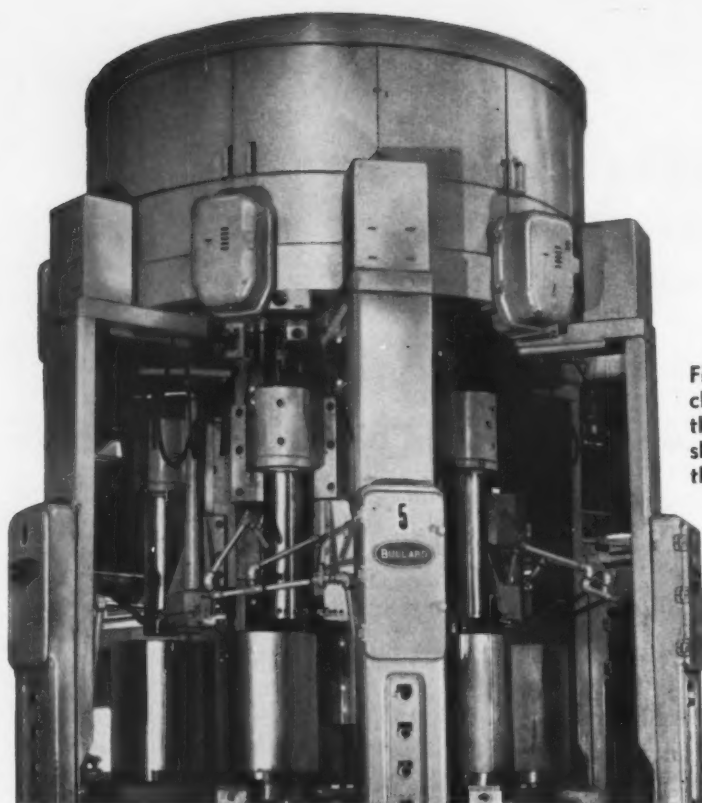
This six-spindle vertical chucking machine automatically prepares the motor-case forging blanks for shear forming. Two separate runs through the machine are required.
